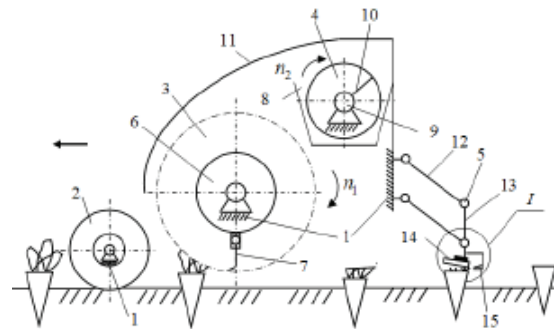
Constructive scheme of the improved machine for haulm cutting: 1—chassis frame; 2—support (reference) wheel; 3—rotor; 4—auger; 5—cutter of heads root crops; 6, 9—drum; 7—knife; 8—chute; 10—spiral; 11—casing; 12—parallelogram hinged suspension; 13—bracket; 14—copier; 15—knife; ←—forward movement.
